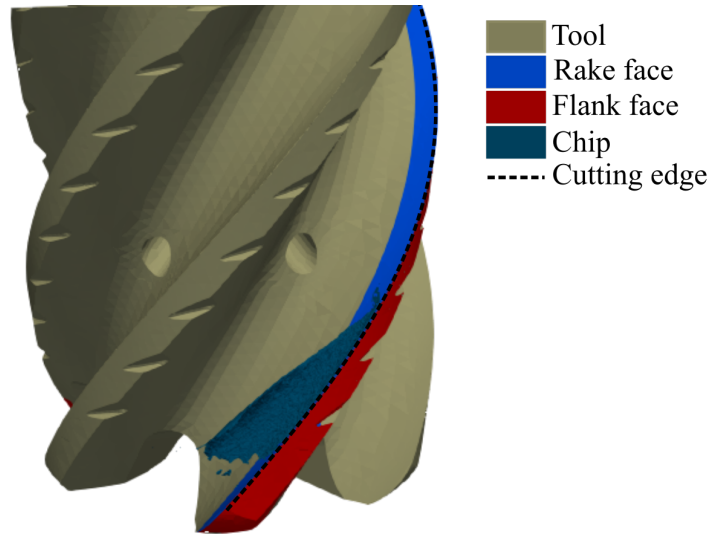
Milling tool with features around the cutting edge highlighted. The geometry shown is a result of a machining simulation for the end milling of titanium, with the chip formation modelled using Advant Edge software and provided by Sandvik Coromant.
